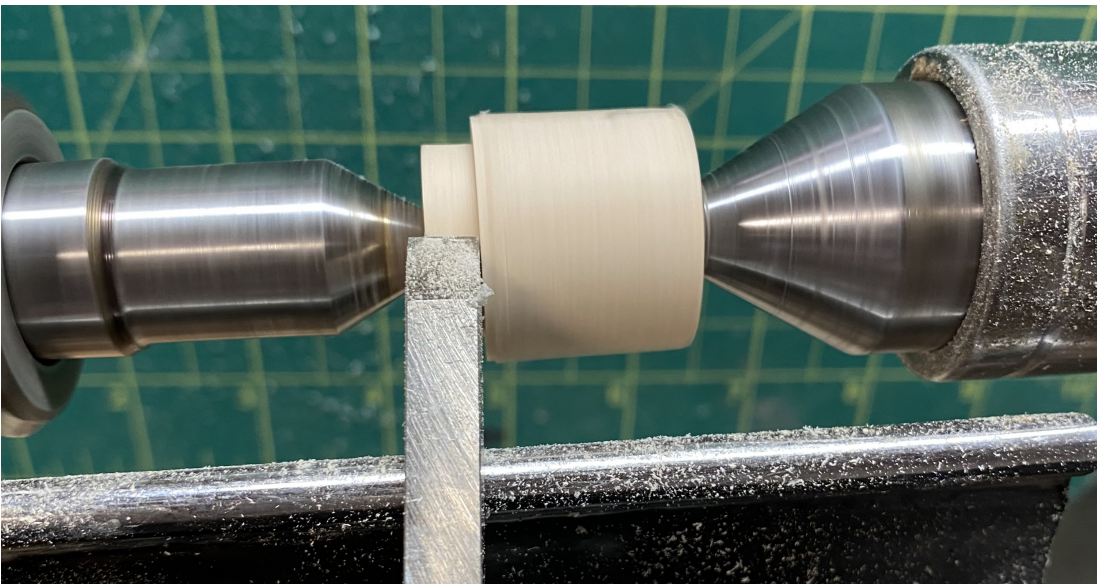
A small 6mm beading tool (basically a 90° skew with a 30° bevel) is used to make a small tenon with the inner diameter of the PVC collet.
